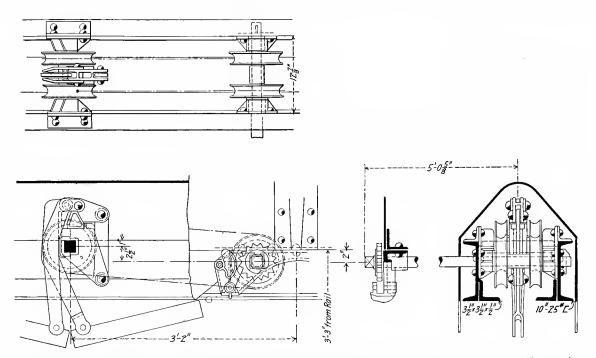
Door Operating Apparatus for All-Steel Hopper Car with Transverse Doors. Enterprise Railway Equipment Company.
